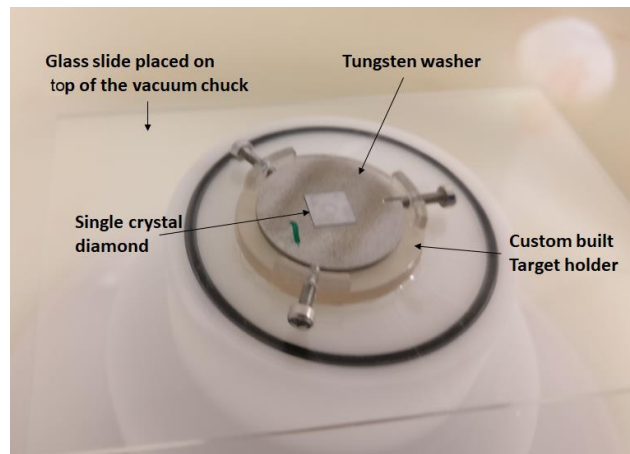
Photograph showing the placement of the 3D printed jig to hold the washer.
